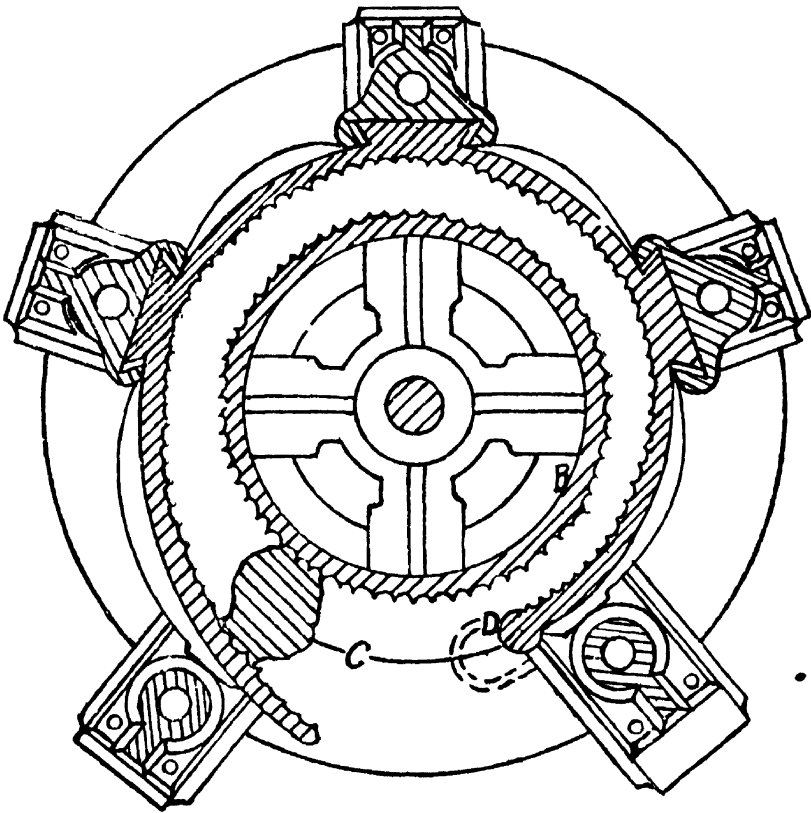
XII.—Drawing of a rotary squeezer. (After Stoughton.)
